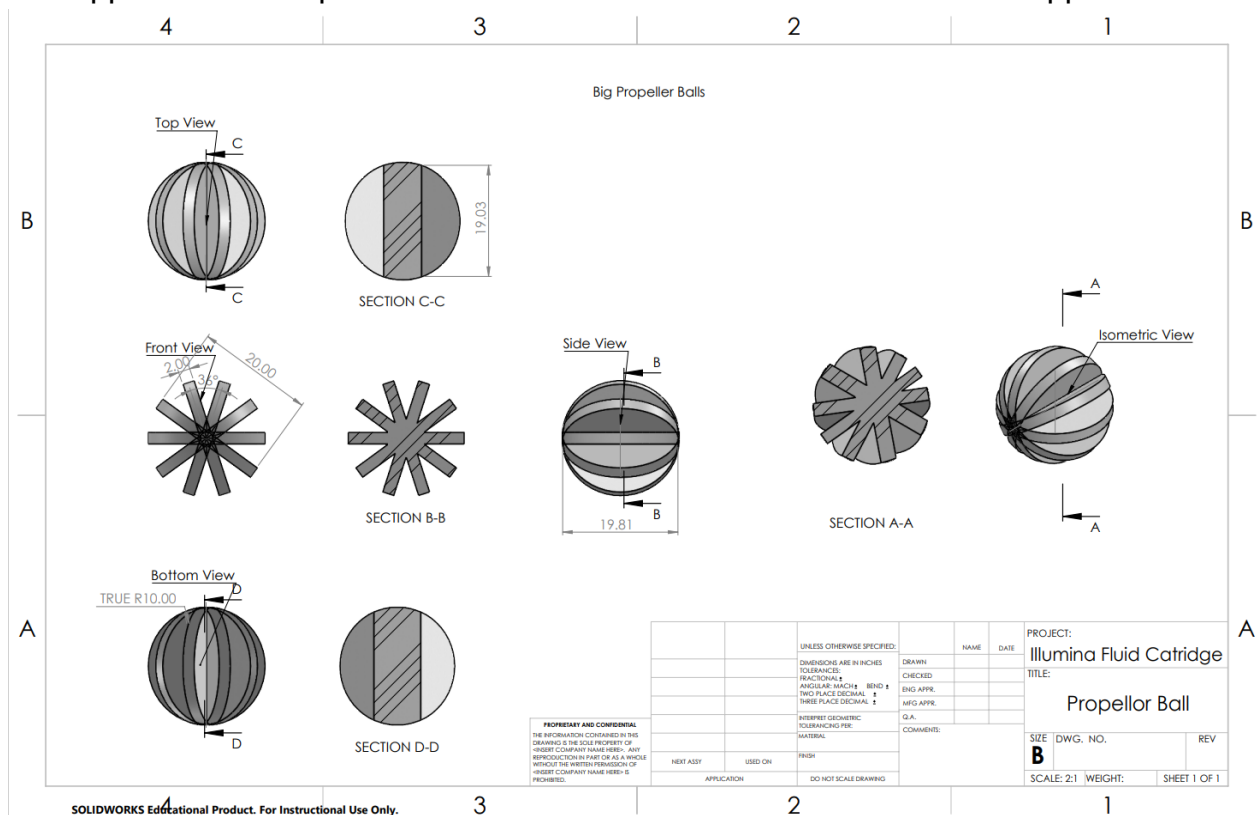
Technical Drawing of Propellor Balls with multiviews (mm). Refer to Appendix C for detailed view
